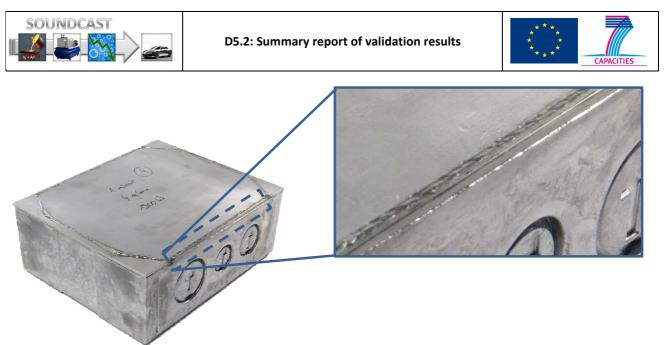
Detailed view of the weld bead after cleaning with an alcohol-based solution
